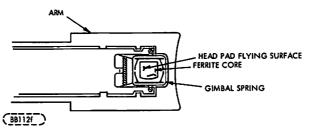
TYPICAL HEAD/ARM COMPONENTS
